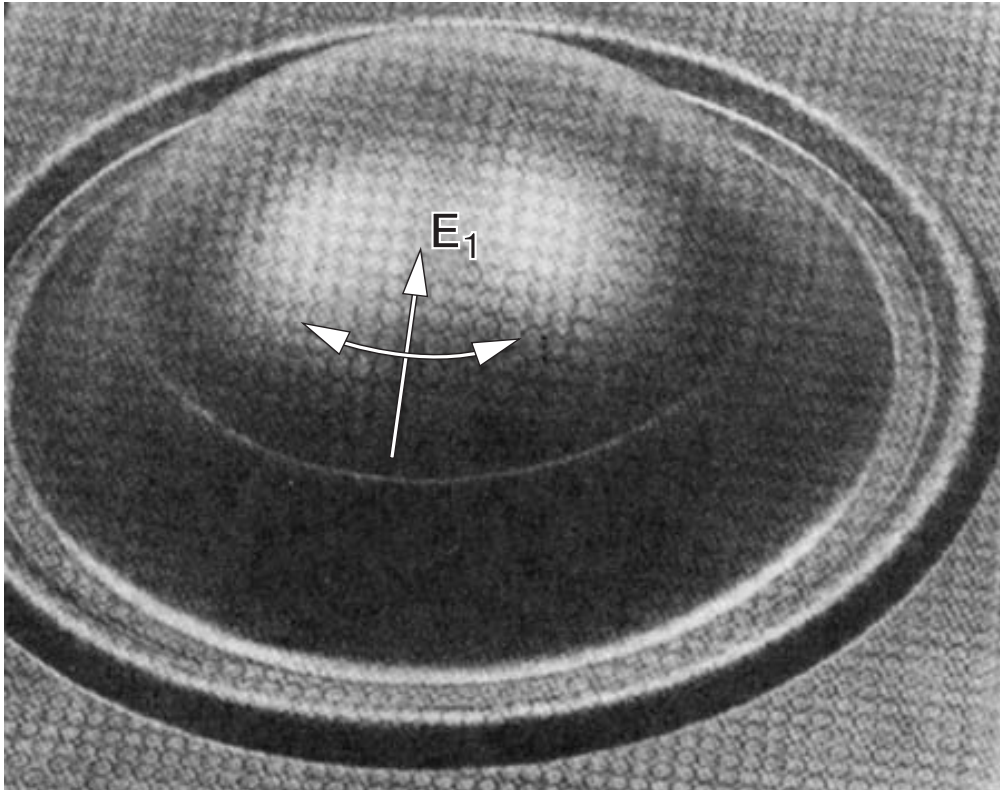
Sheet specimen subjected to punch–stretch test until necking; necking can be seen by the clear line. (Courtesy of S. S. Hecker.)
